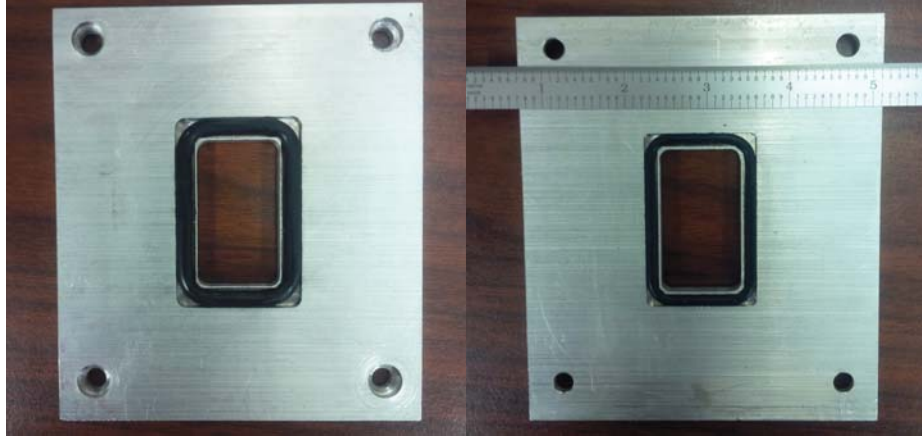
Seal plate showing the front O-ring on the left, and the back O-ring on the right.
